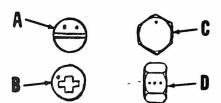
A—Marks used by one manufacturer to identify fasteners having ISO Threads. Small dots represent punch or die marks. Slotted screw and set screw marks are shown at (A), Phillips head screw at (B), bolt head at (C) and side view of nut at (D).
